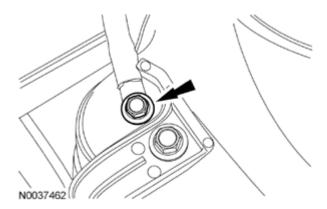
Locating Ground Wire And Bolt Courtesy of FORD MOTOR CO.
